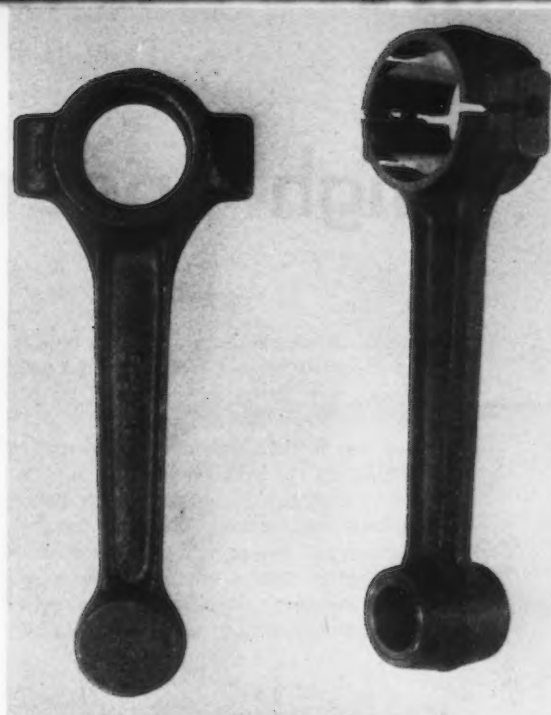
Connecting rods are forged with a round crank pin hole, machined and heat treated in one piece. Then the cap is fractured from the rod. The forging is shown at left and the machined rod at right.
